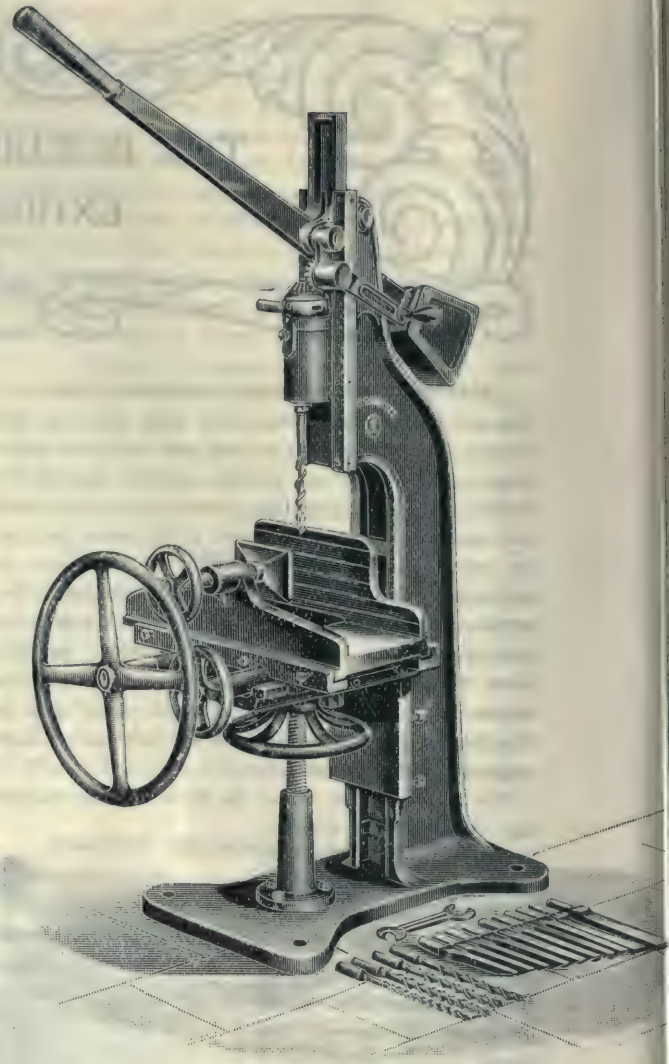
CARRON HAND MORTISING AND BORING MACHINE.
